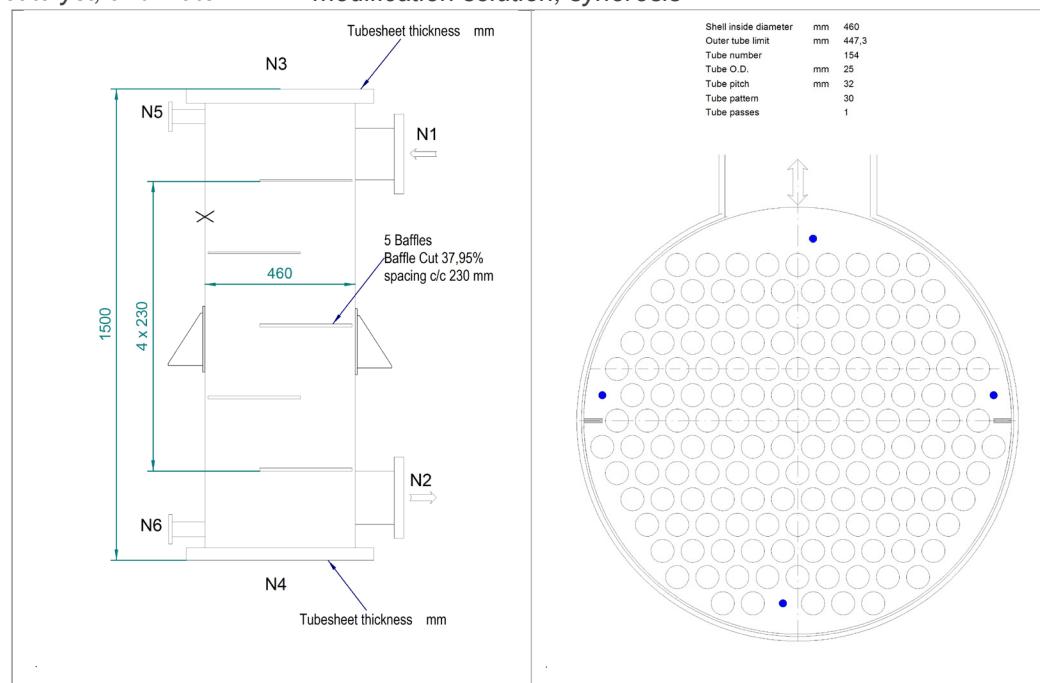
Tube bundle reactor (R1000), the side view (left) without the closing head and feet part. The cross section (right) shows the 155 tubes for the sol gel reaction and alignment notches in blue for head and feet part.
